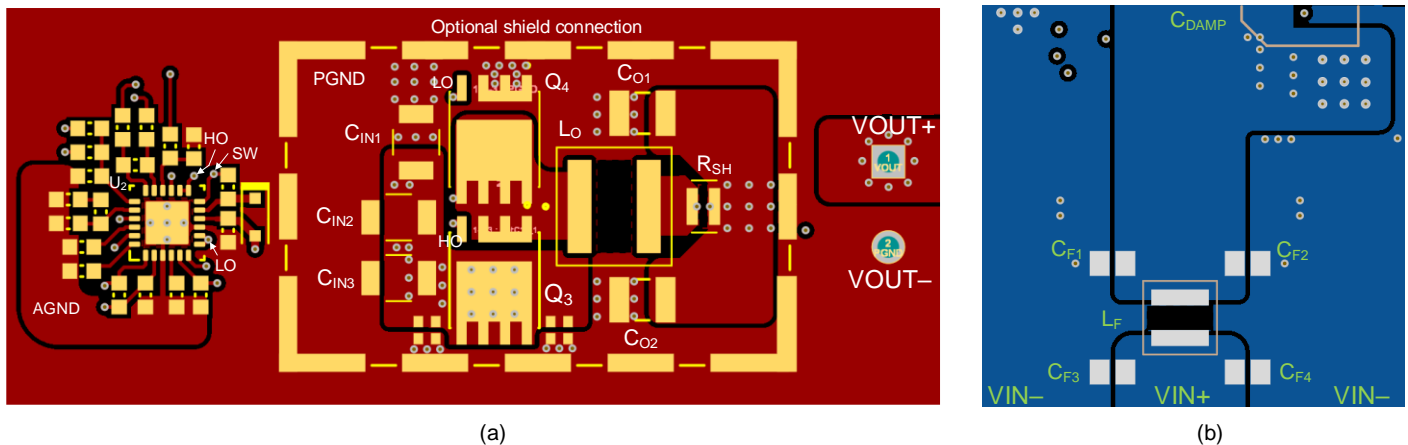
Buck power-stage PCB layout (top-down view): top layer (a) and EMI filter on the bottom layer (b).
